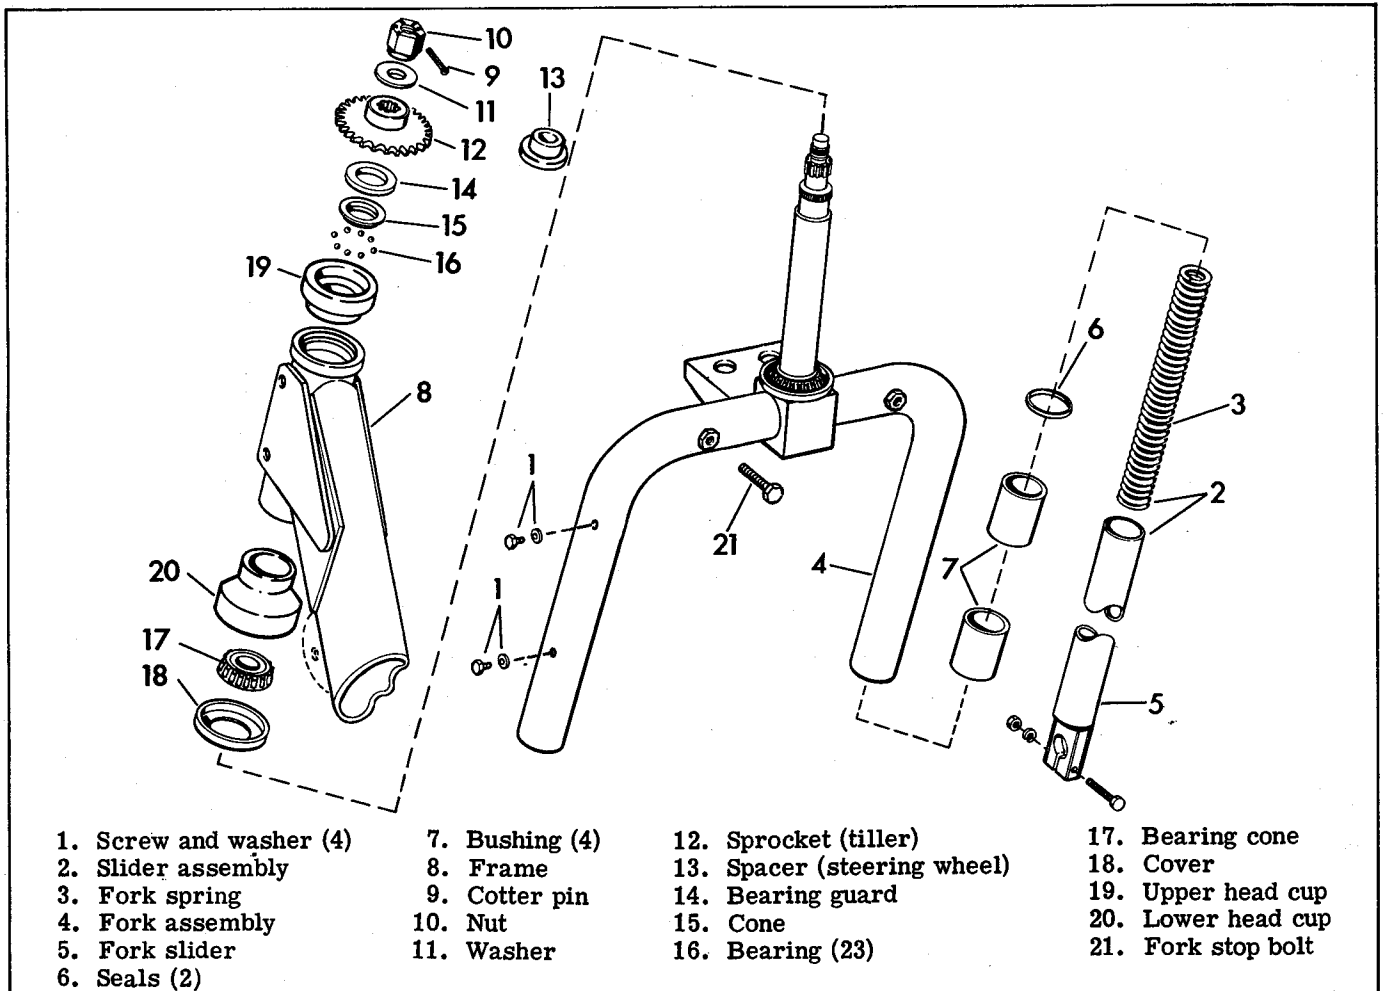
Front Fork 1969 and Earlier - Exploded View
